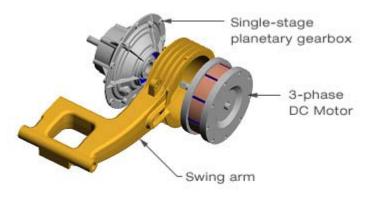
125V DC Brushless Motor with attached gearbox
